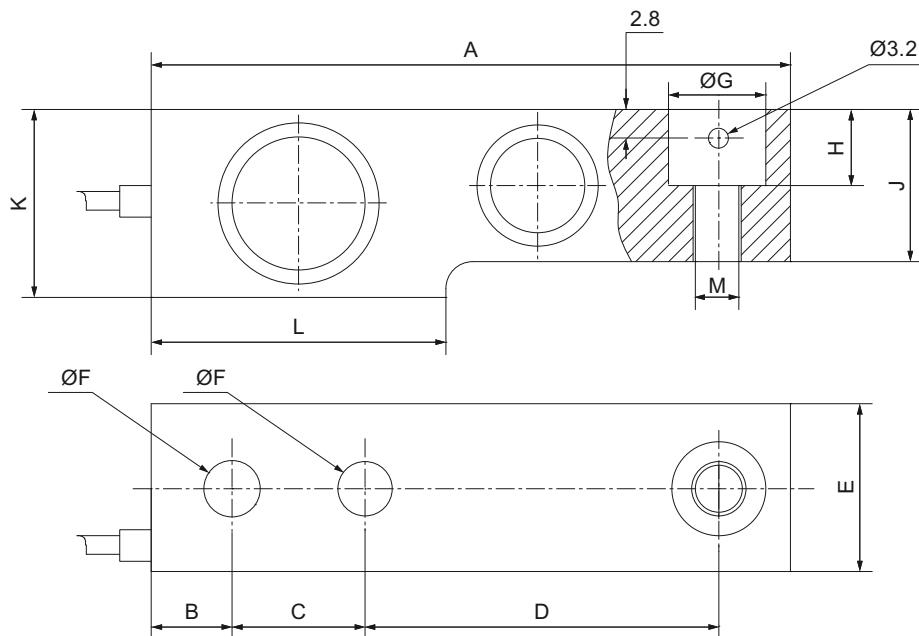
SIWAREX WL230 SB-S SA dimension drawing
